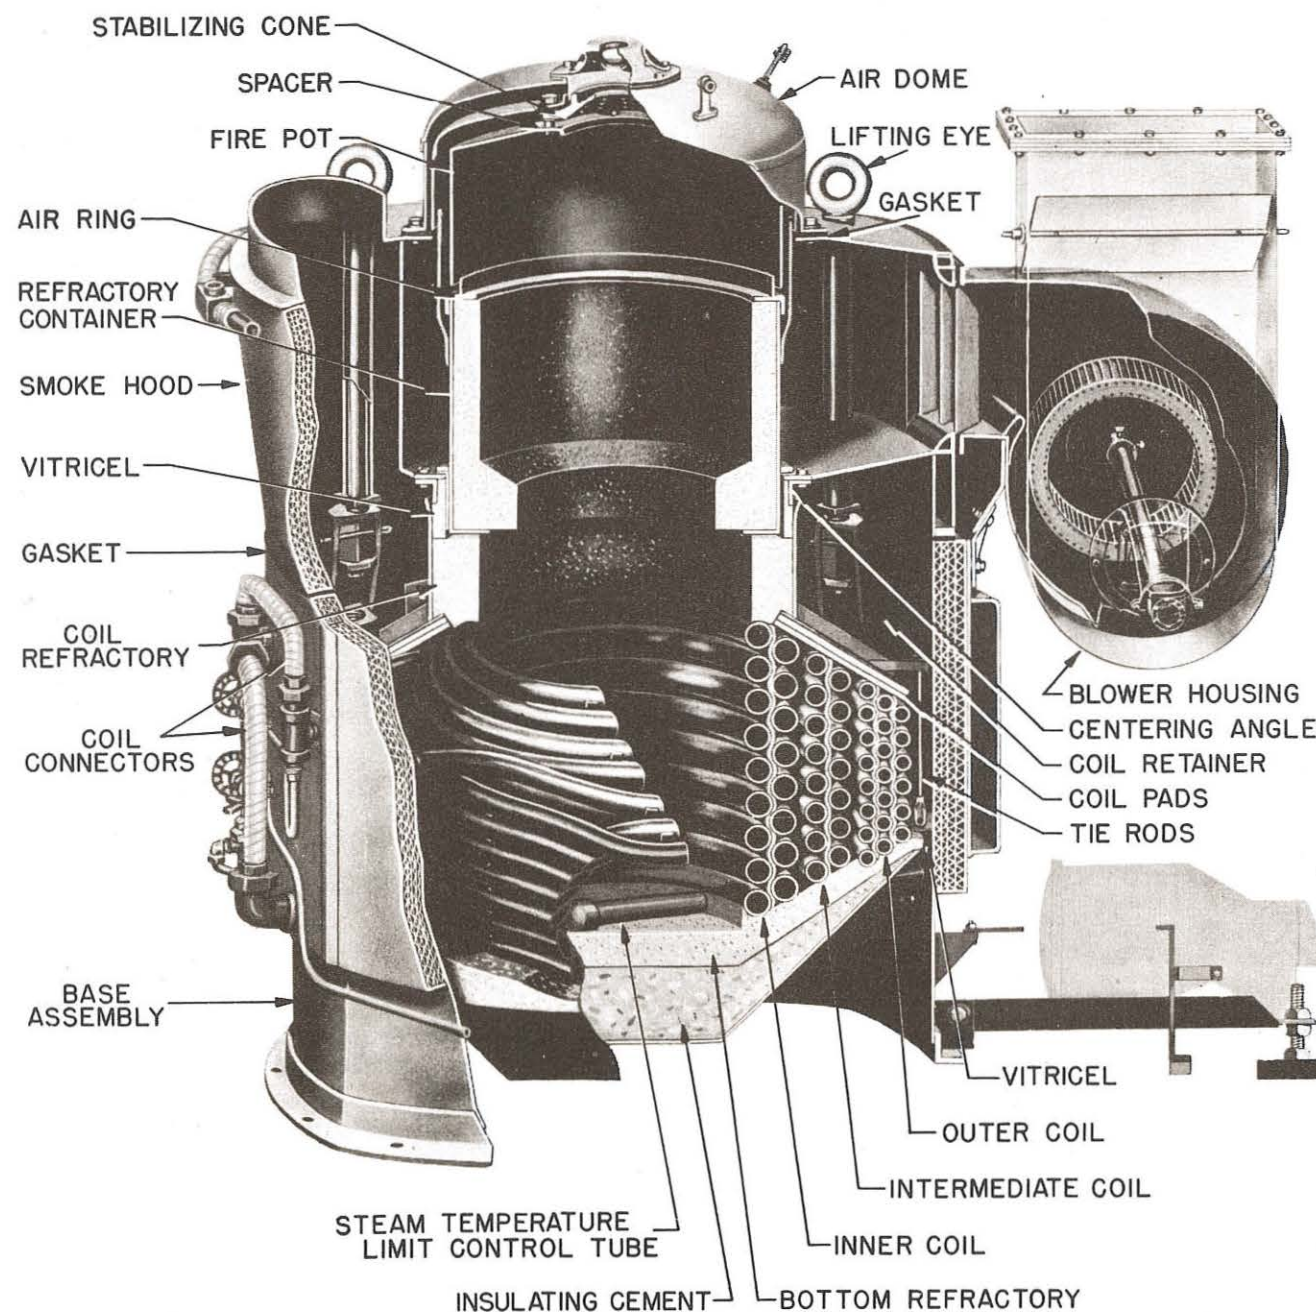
OK-4630 Boiler and Blower Assembly.
